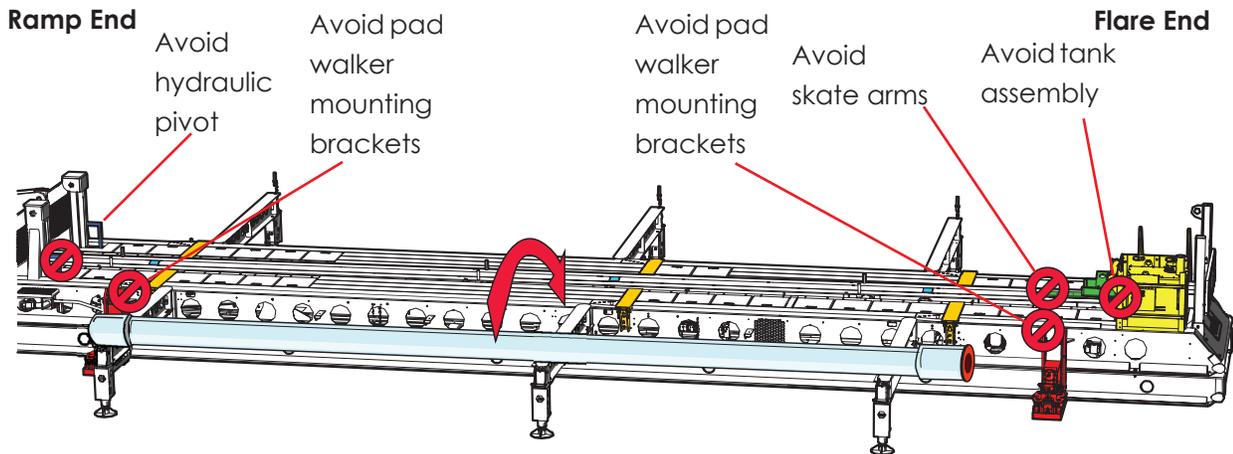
PC3000 with Pad Walker and Hydraulic Ramp, Driller's Side (DS)
